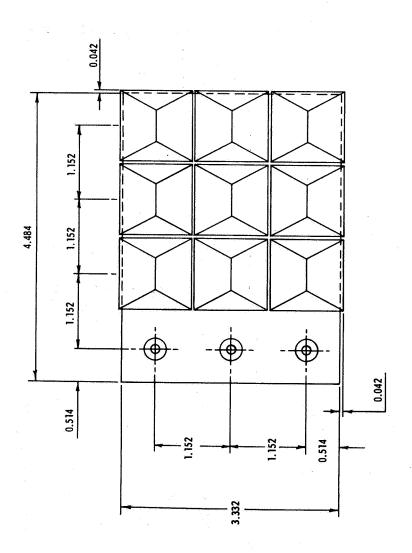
REFERENCE DESIGN—GENERATOR PANEL SECTION ASSEMBLY
